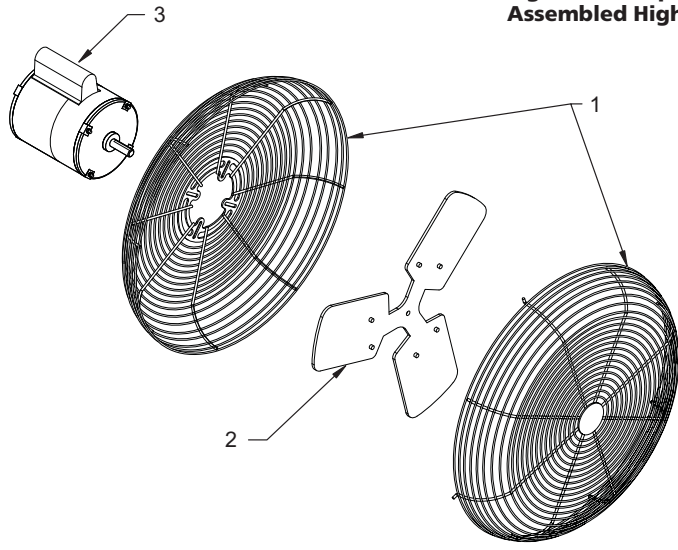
Repair Parts Illustration for Industrial Assembled High-Ambient Air Circulator Heads
